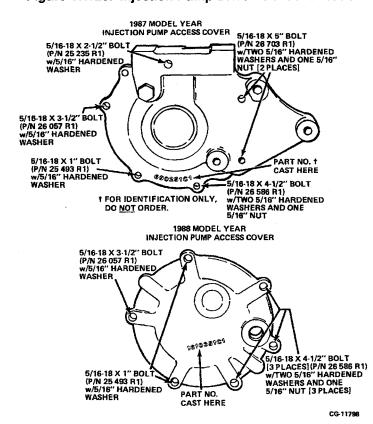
Injection Pump Access Cover Mounting Hardware Location
